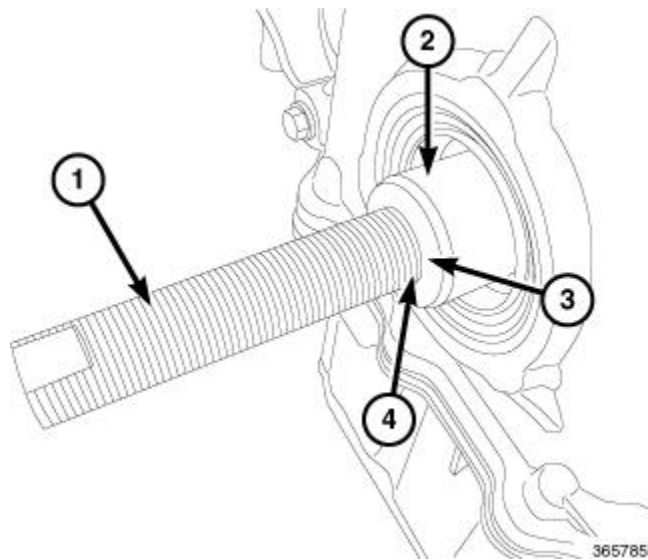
Installing Vibration Damper Tool Onto Crankshaft
